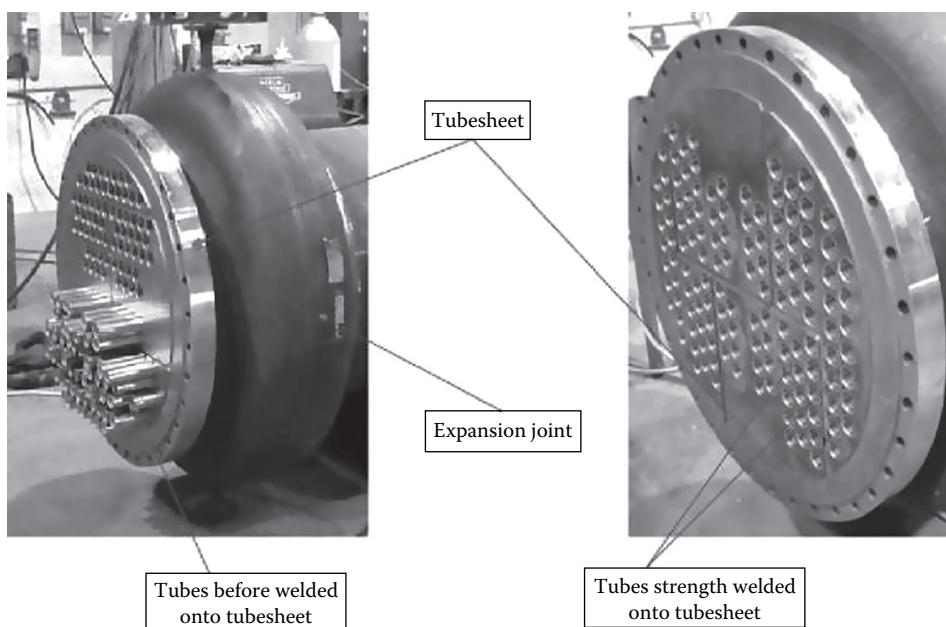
Tube-to-tubesheet joint—tubes under insertion and tubes welded to tubesheet. (Courtesy of Festival City Fabricators, div. of CSTI, Stratford, Ontario, Canada.)
